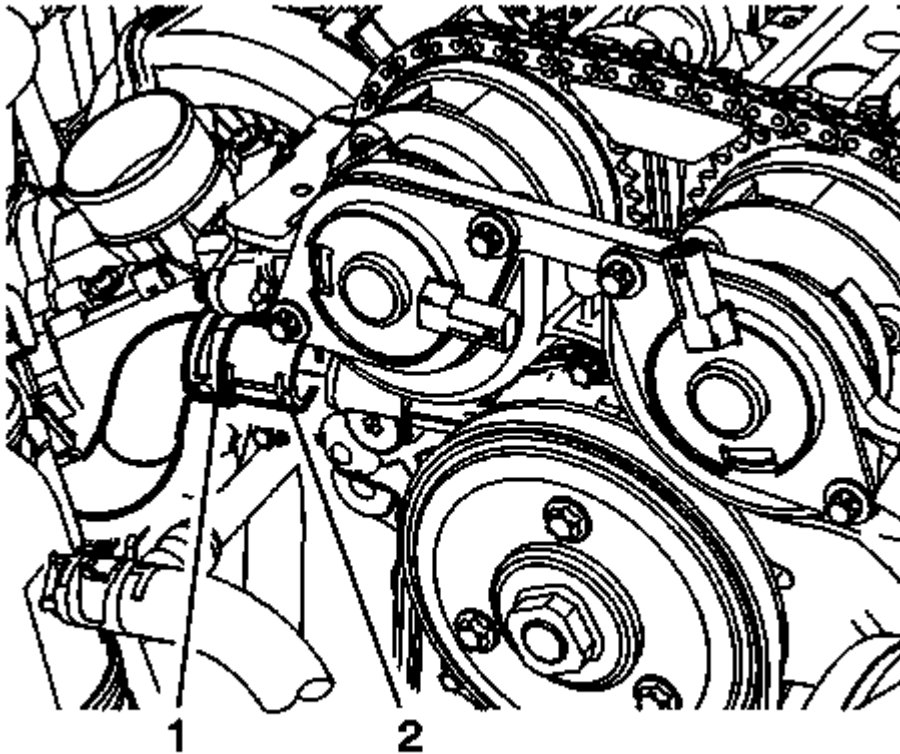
Heater Water Shutoff Valve Inlet Hose And Clamp
